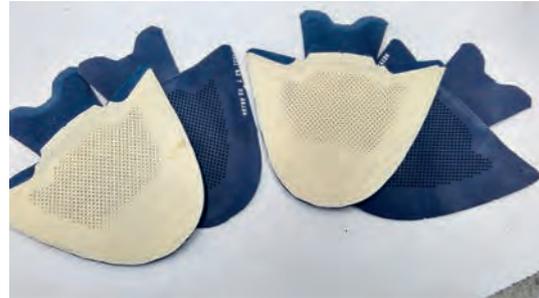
Perforation of shoe upper blank parts manufactured with the developed tooling
